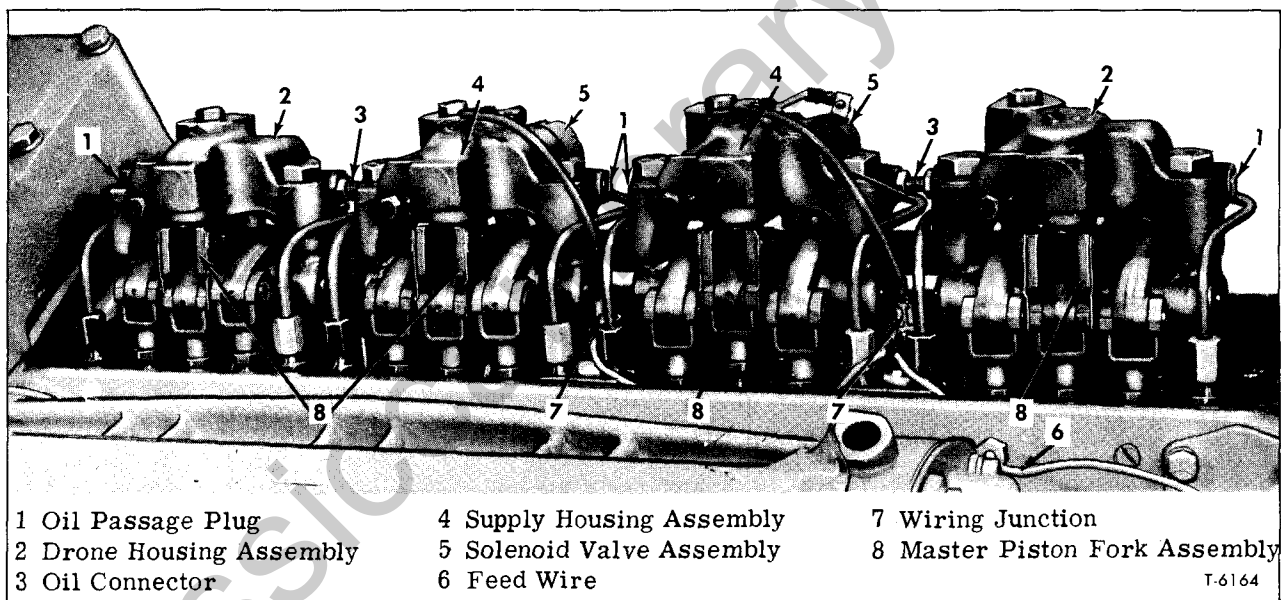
Engine Brake Mechanism on 8V-71 Engine
